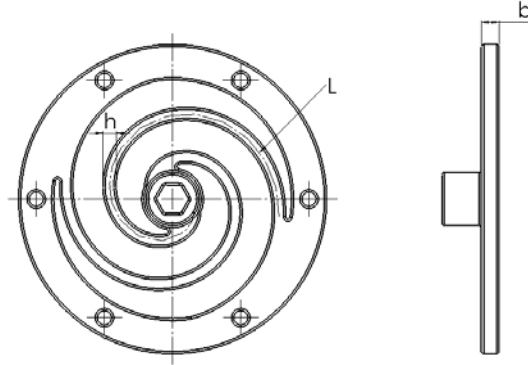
Planar torsion spring with labelled dimensions for calculating spring constant
